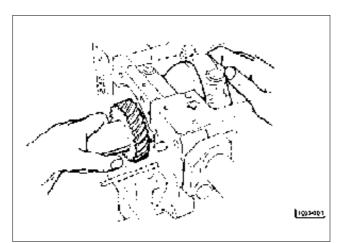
Turn the crankshaft and make sure it can rotate freely and no interference between pistons and spray nozzles occur, then measure the crankshaft end play;
